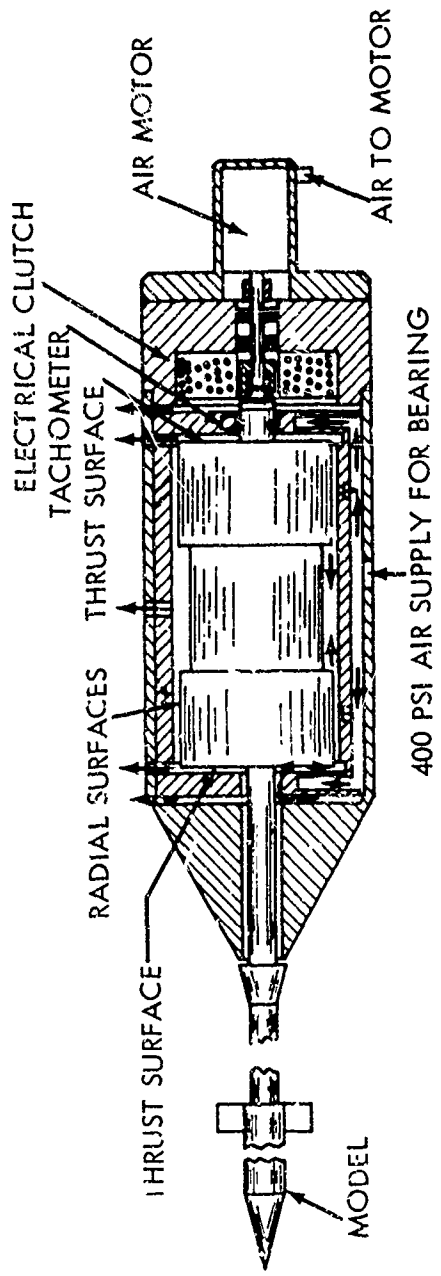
AIR BEARING ROLL DAMPING MECHANISM
